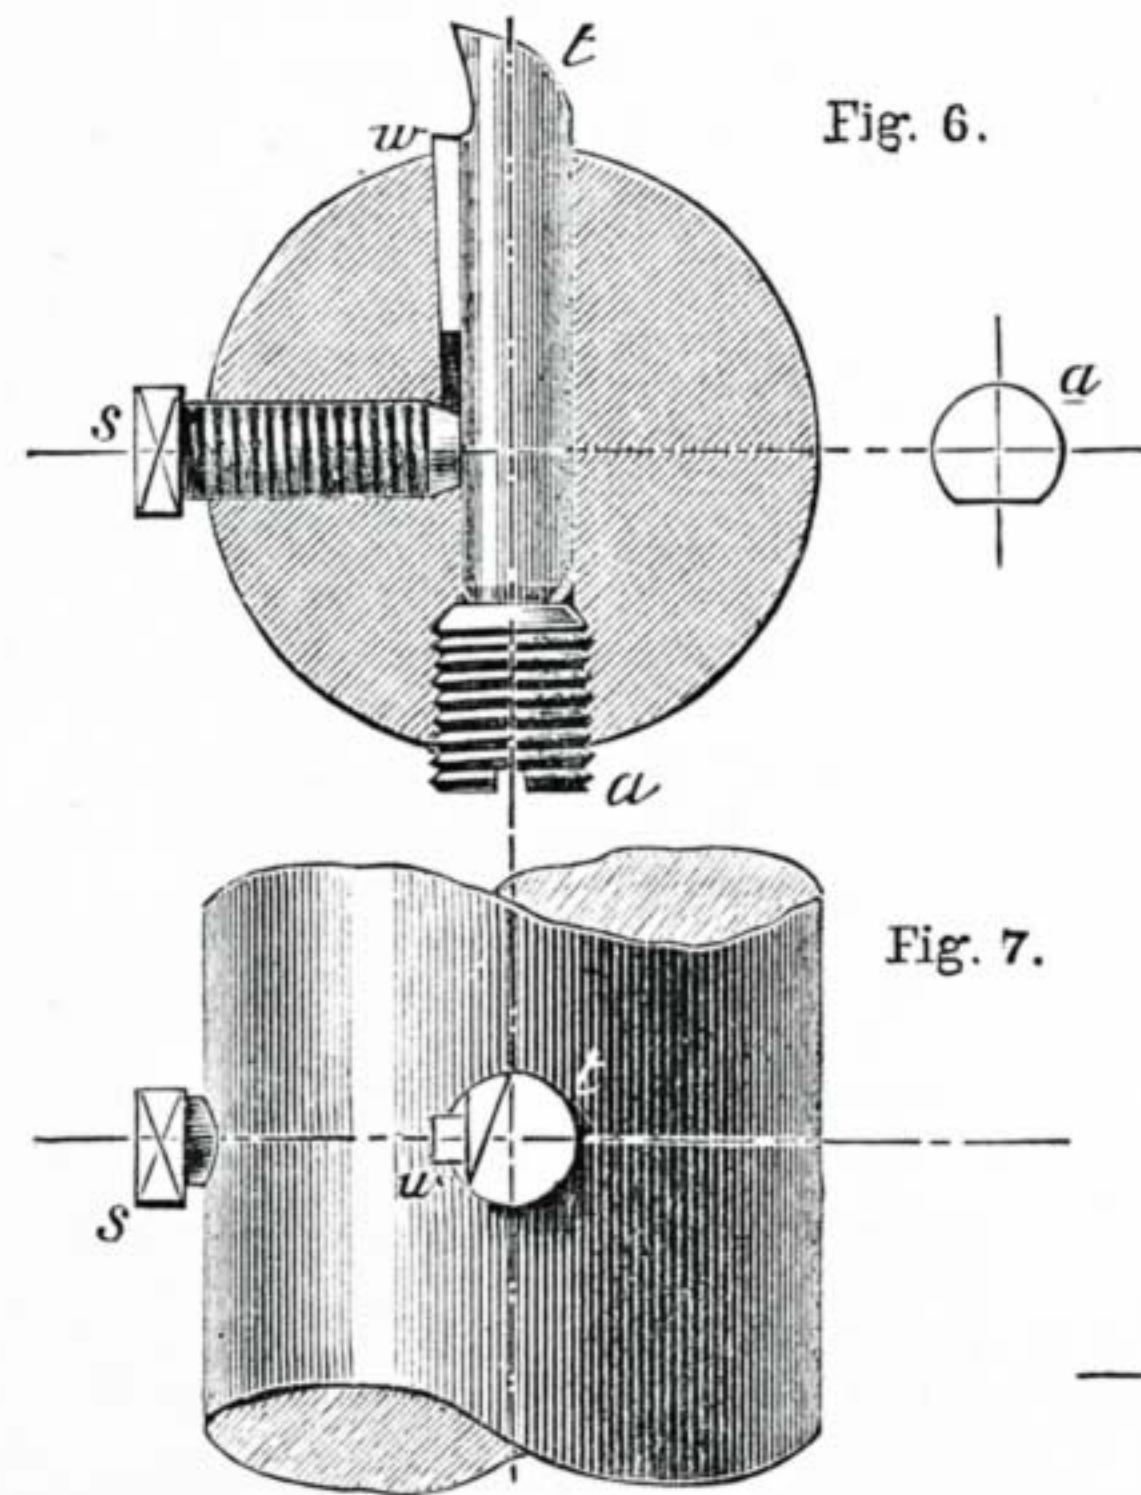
Section of Boring Bar, showing Method of Fixing Tool. Fig. 7.—Bar in Elevation.
